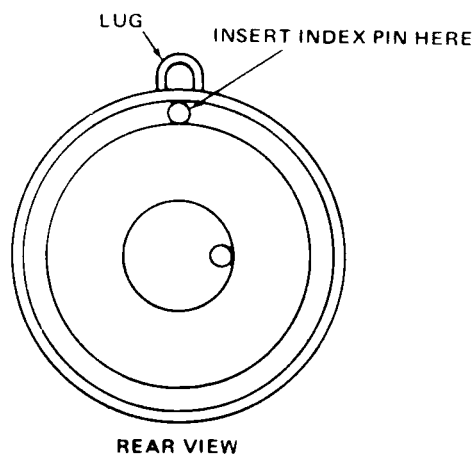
12 O'Clock Position Index Hole in Bomb Body
